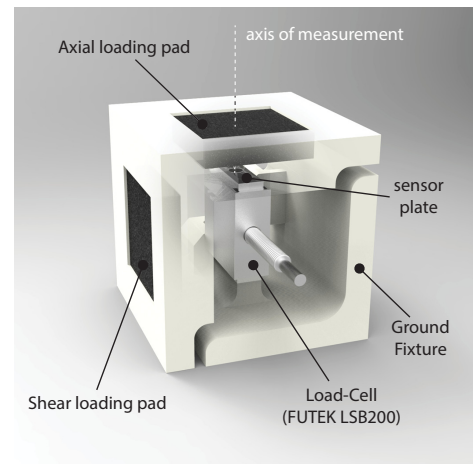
Custom load-cell fixture I manufactured using FDM rapid prototyper.
